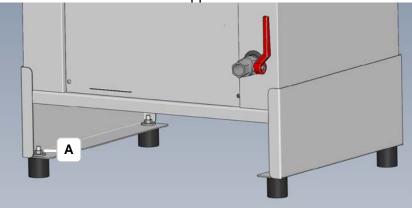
Absorber feet mounted to the frame frame is not mounted to the floor
